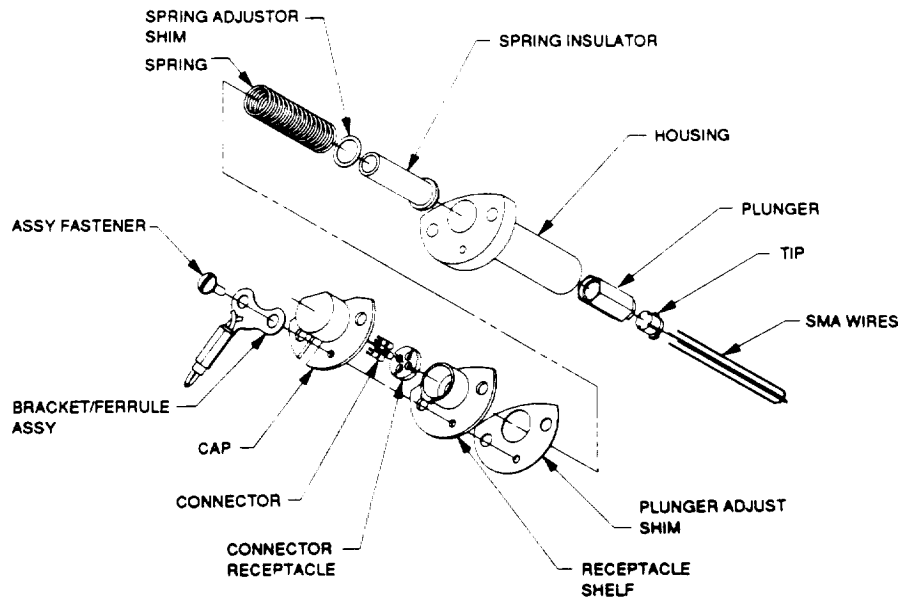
Exploded-View Isometric of the Fail-Safe Actuator
